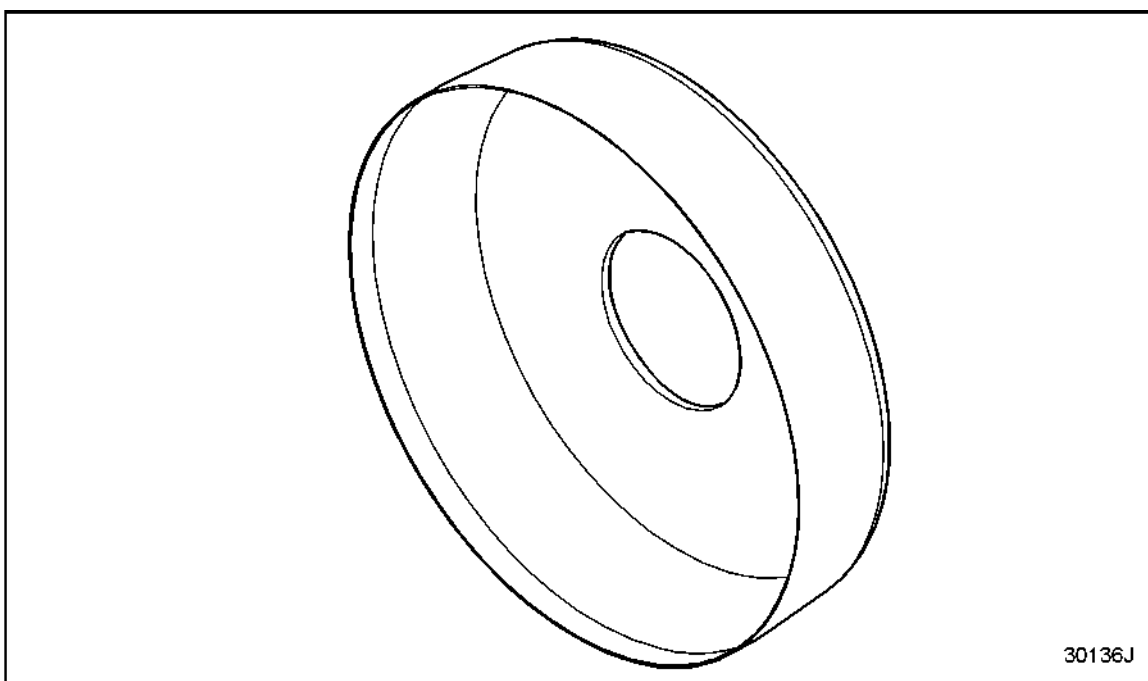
FRT/RR Seal Expander (Oversize),J 4195-01
